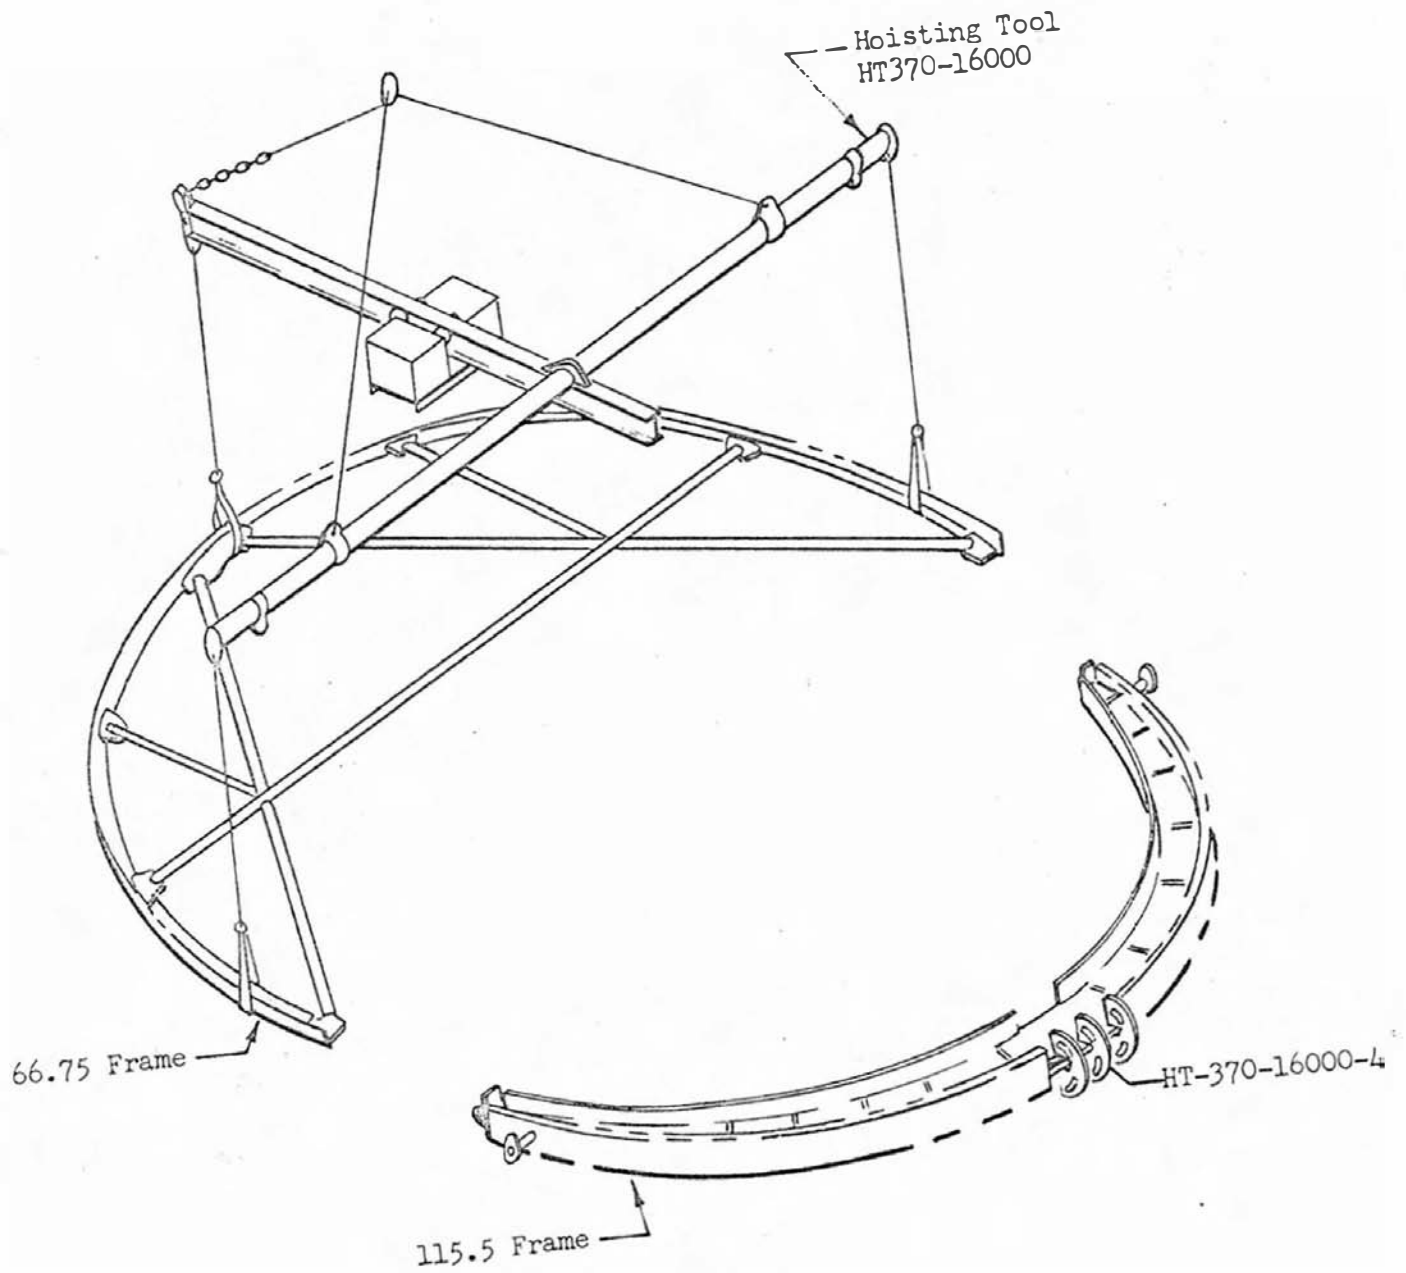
8. Hoisting Tool for Stations 66.75 and 115.5 Frame Assemblies
